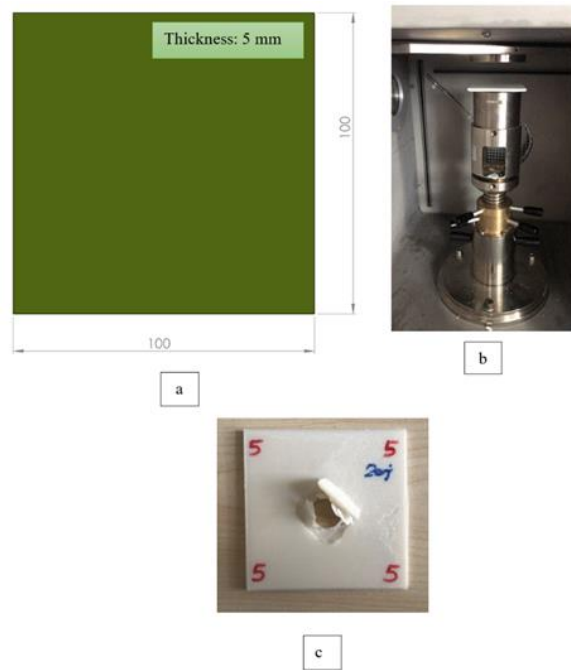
(a) CAD-model of the impact specimen according to ISO 6603 (Dimensions are given in millimetres.), (b) Instron Ceast 9350 impact test machine, and (c) an impacted specimen
